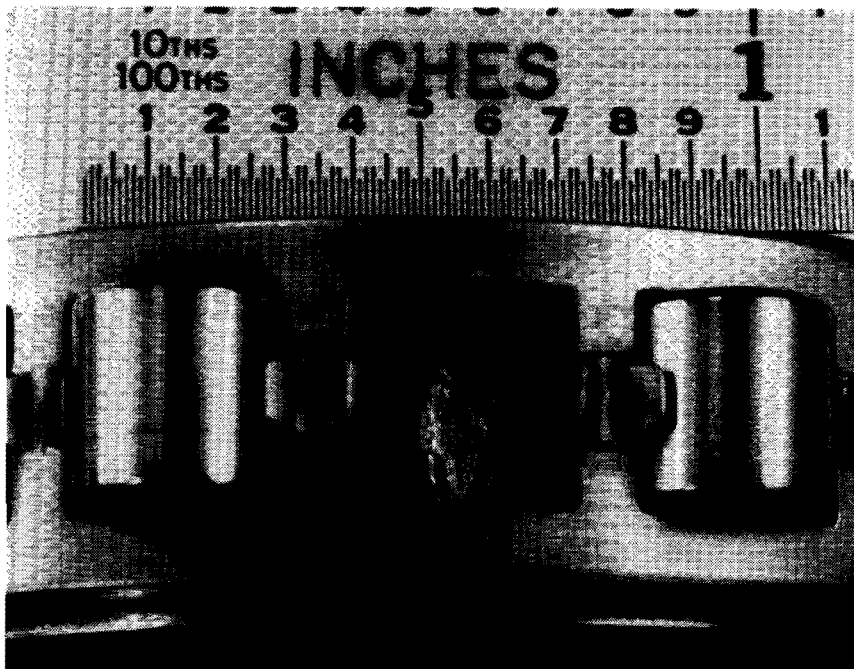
90-Degree Gearbox -407 Bearing Inner Race C/D,
